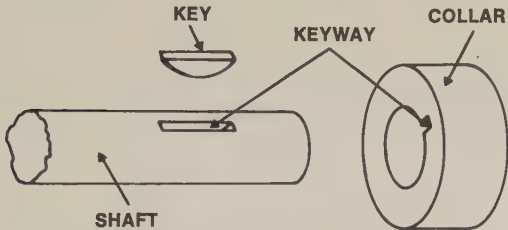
A key fits into slots, called keyways, to hold two parts in place.
